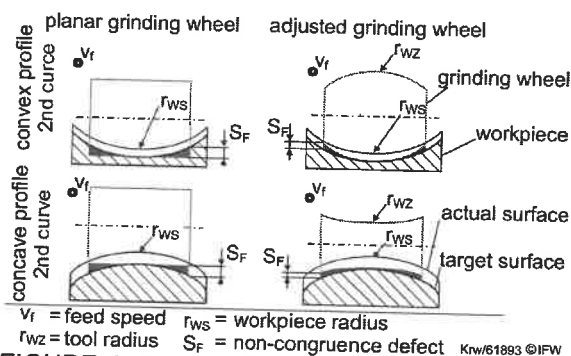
Non-congruence defect for different workpiece shapes and grinding tool profiles
